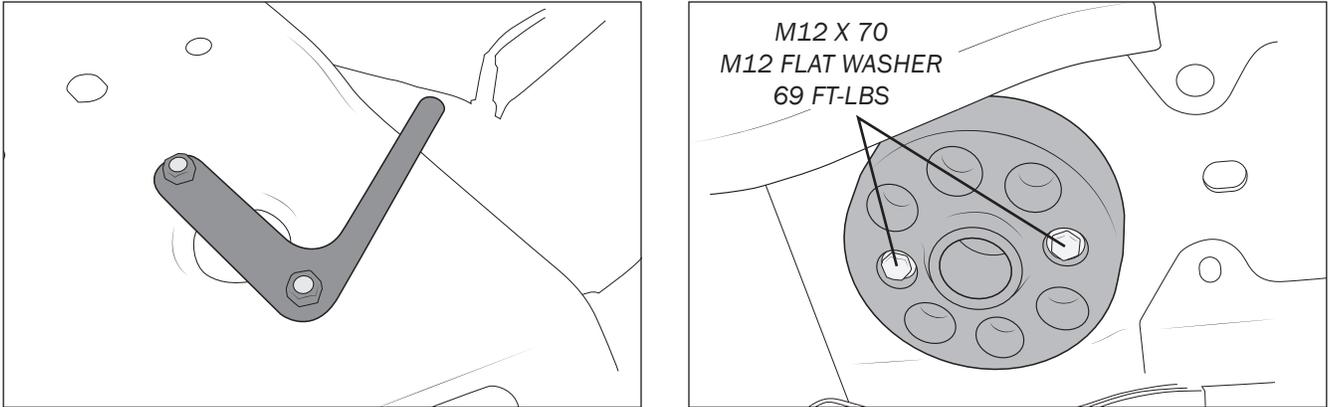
Left: Tabbed nut-plate, Right: AEV Coil Spacer
